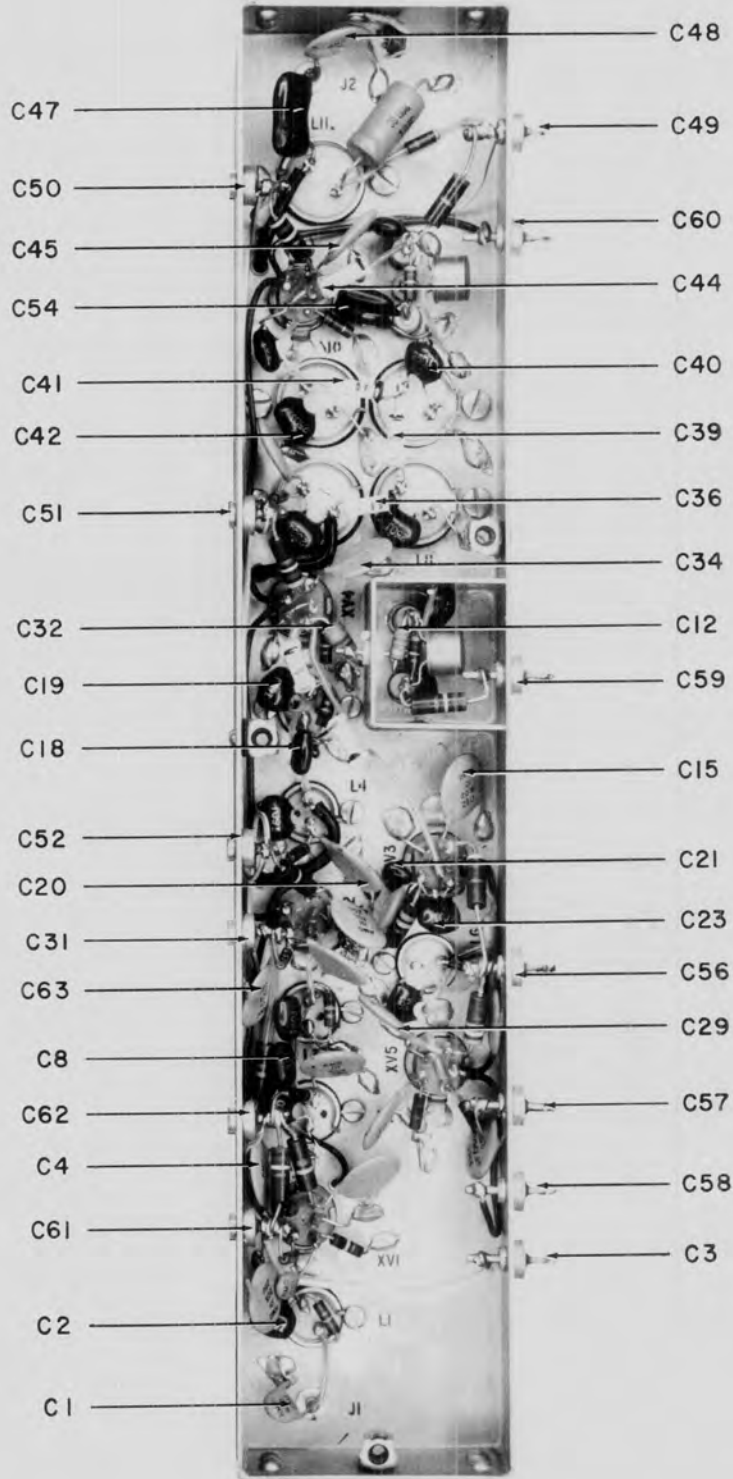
Type 8002 IF Sweep Chassis, Component Locations
